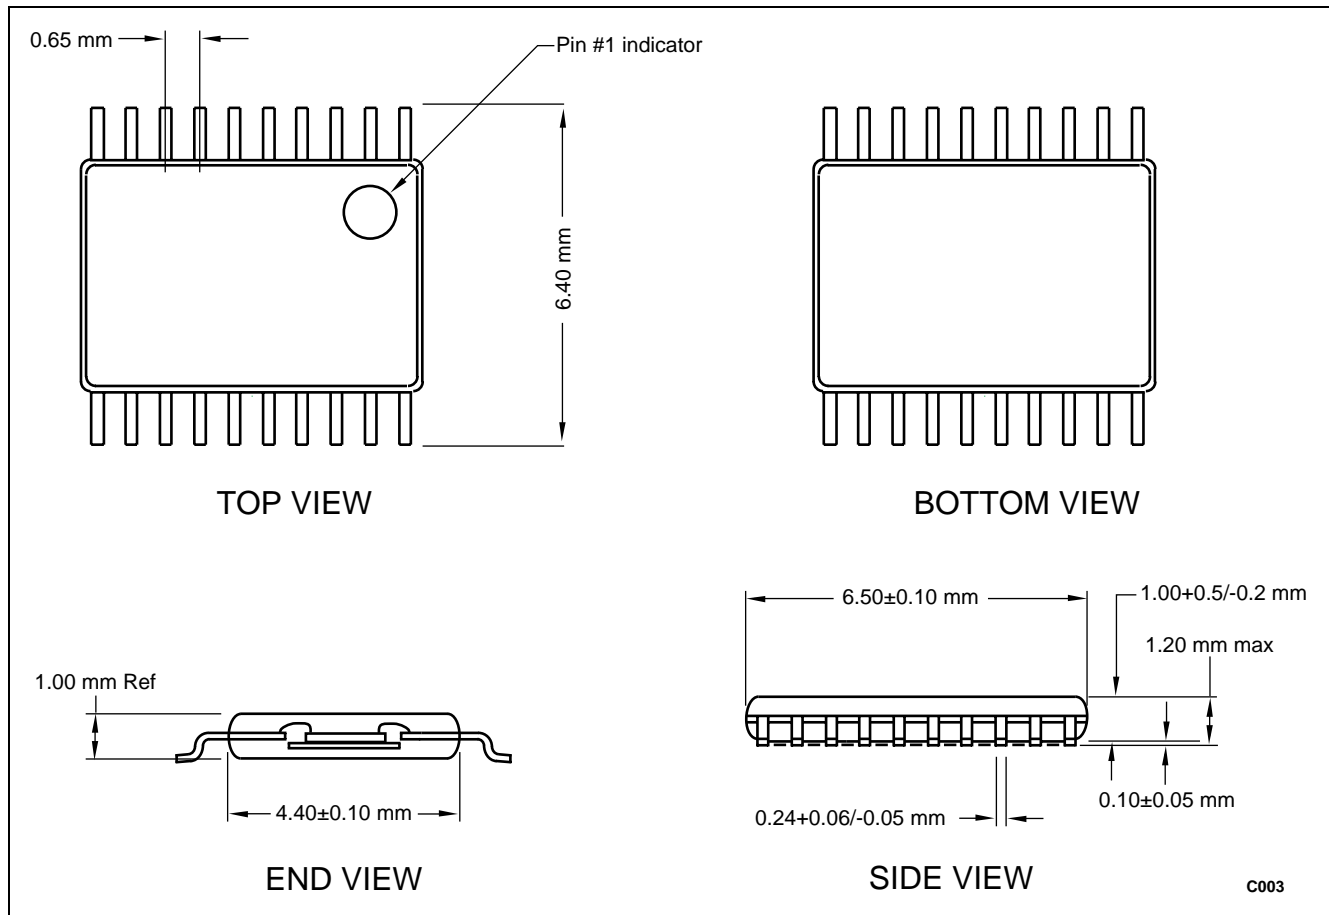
RF210(A/B) Package Dimensions – 20-Pin TSSOP
